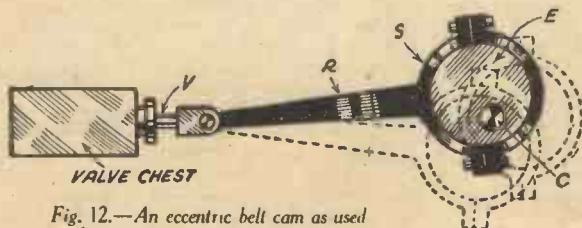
An eccentric belt cam as used for operating steam engine valves
